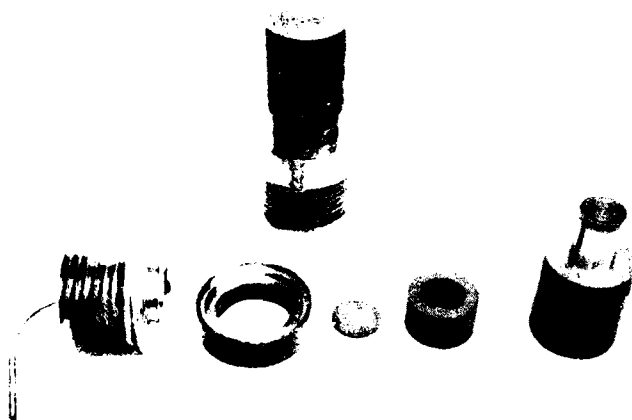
Transistor Soldering Fixture: The transistor chip is positioned with respect to the anode weld flange with the large ring near the center of the photograph. The disc next to the ring prevents solder from splashing onto the emitter area of the chip. The smaller ring weights and positions the base contact ring. The overall solder weight is the large part to the far right. At the top of the photograph is a complete fixtured assembly ready for soldering in a furnace.
